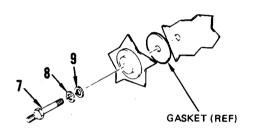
Removal; Aft Fuselage Tank (Sheet 2)
